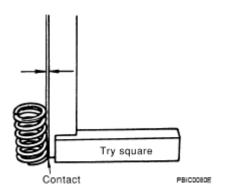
Measuring Clearance Between Top Of Valve Spring And Try Square
